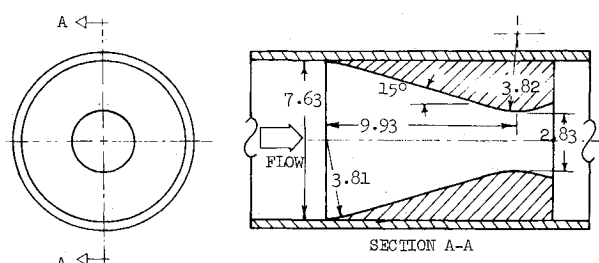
15° conical liquid rocket nozzle. (All dimensions in inches.)
